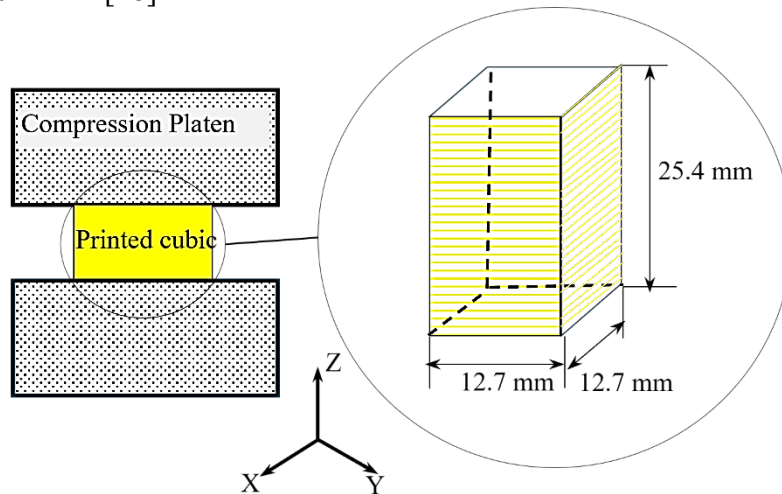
Schematic of the compression tests and compression test samples used to characterise the 3D printed materials.
